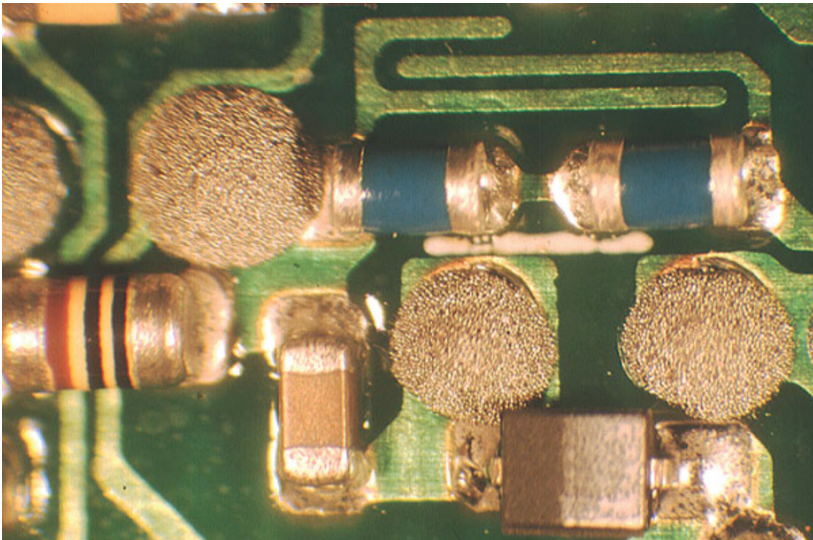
Solder paste that has been dispensed onto a single-sided board after initial reflow of the surface mount parts. This operation allows either manual or automatic insertion of through-hole parts prior to the second reflow operation.
